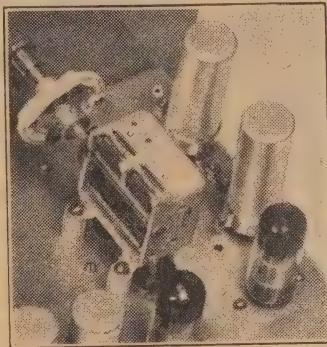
Details of the gang mountings and the insulated shaft coupling are clearly shown in this photograph taken before the gang shield had been fitted.
